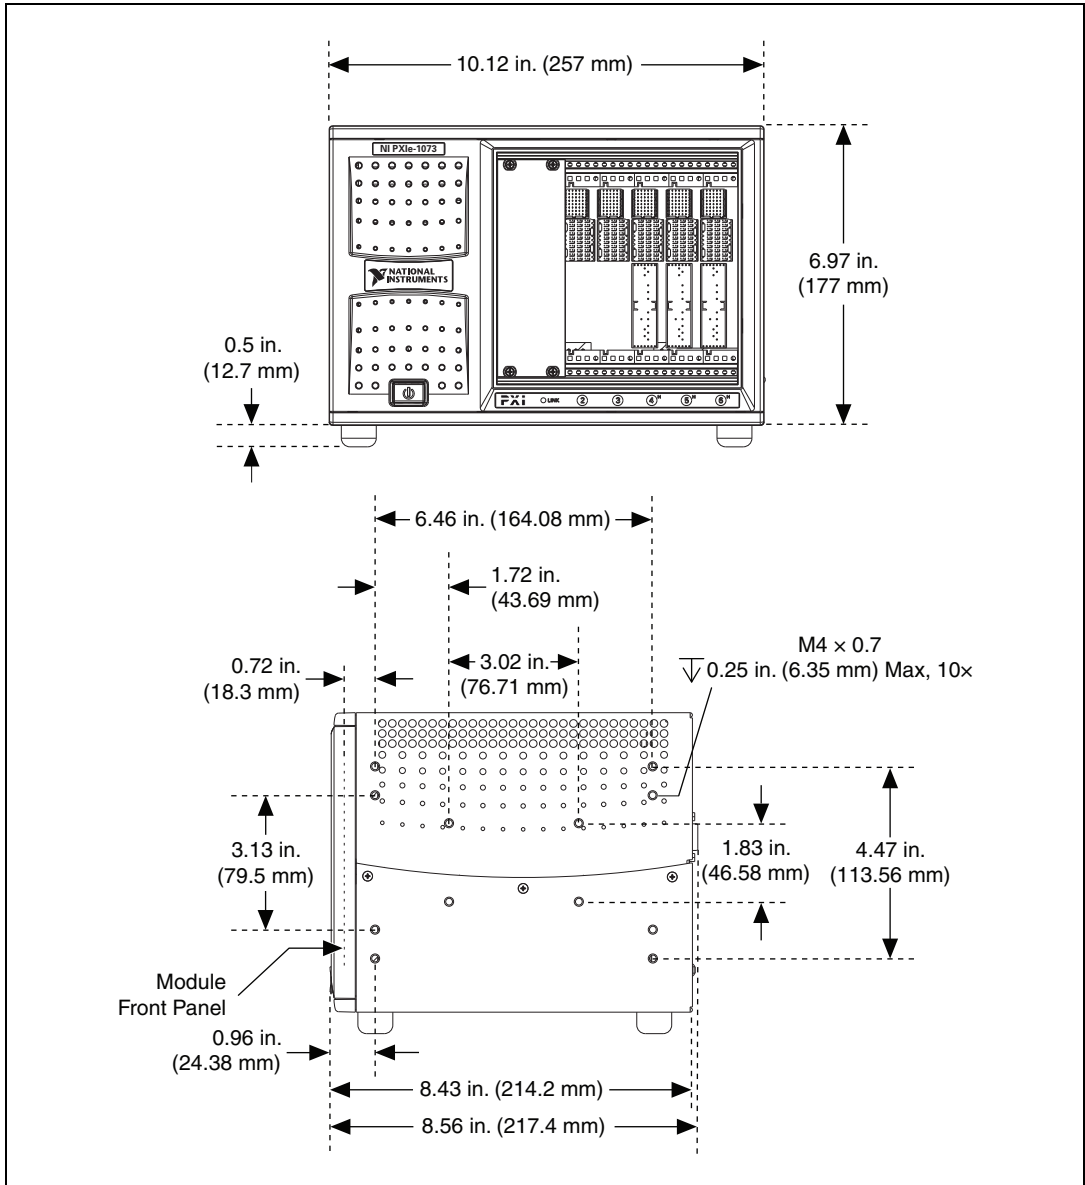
NI PXIe-1073 Chassis Dimensions (Front and Side)
